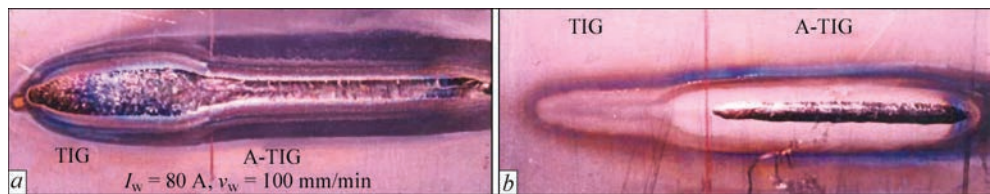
Appearance of welds, produced by TIG (left) and A-TIG (right) welding of VT-20 titanium alloy of $\delta = 3$ mm thick on one welding mode: welding current is 80 A; speed of welding is 100 mm/min: a — outer weld surface; b — back surface (root) of the weld (results of personal investigations)
